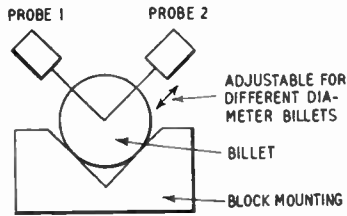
Schematic diagram showing inspection system for the detection of central cracks in cylindrical materials.
